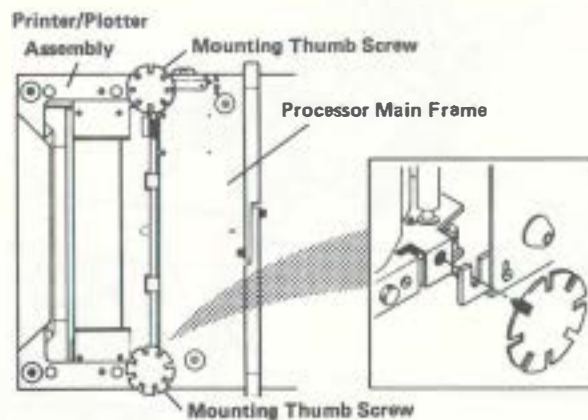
Printer/Plotter Thumbwheel Mounting Screws
